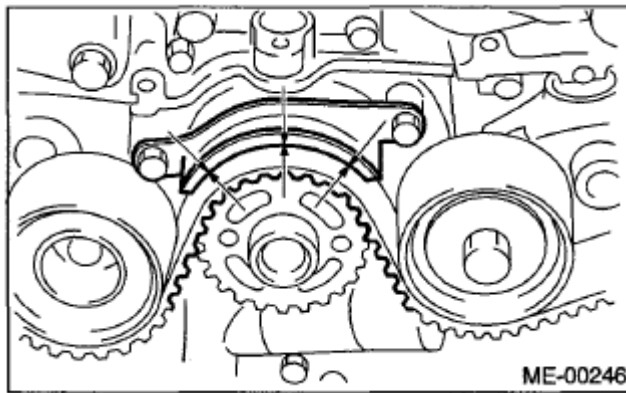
Adjusting Clearance Between Timing Belt And Timing Belt Guide Using Thickness Gauge (1 Of 5)
